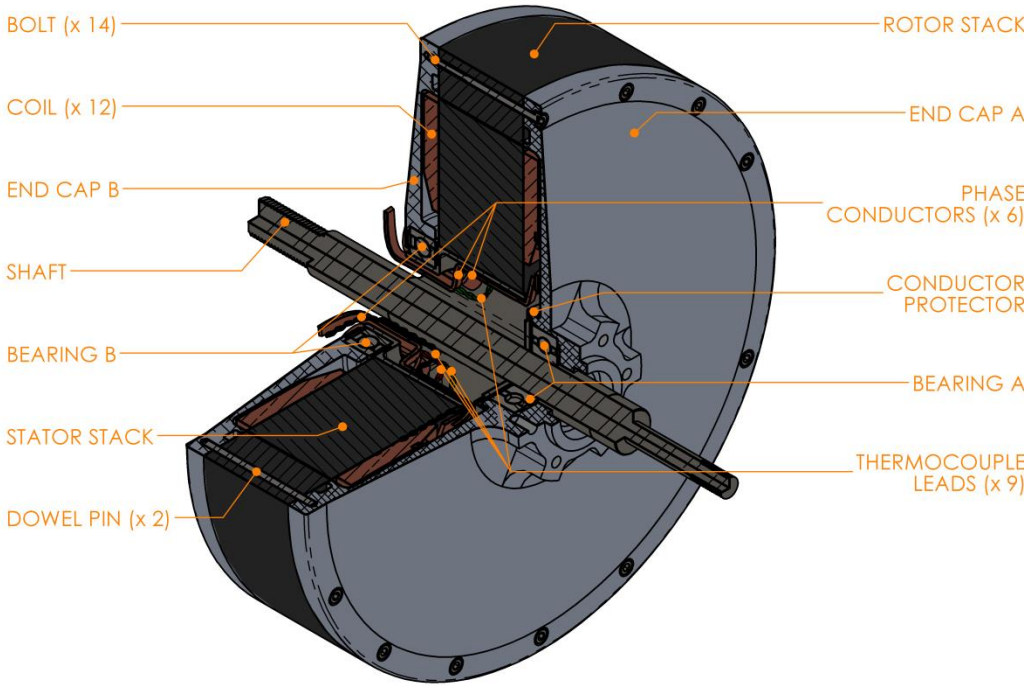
Assembly component detail (12/16 CSR prototype)
